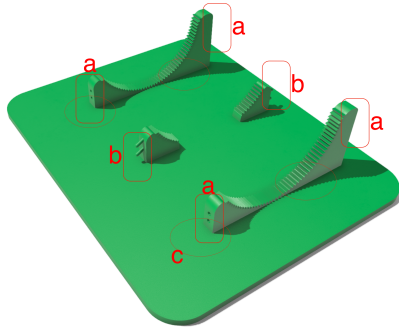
CAD view of the fixture, highlighting (a) four mounting points for M2 screws to secure the wraps, (b) two alignment pins to ensure consistent stencil placement, and (c) four designated slots for 20mm magnets to affix the fixture within the toolbox.
